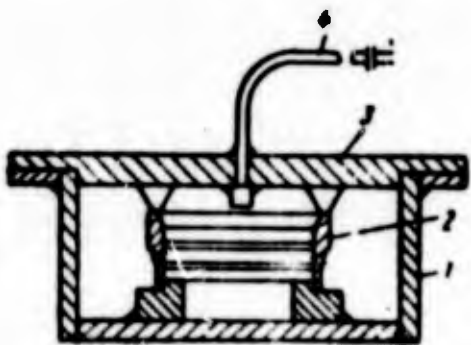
Container for soldering of head in a vacuum. 1) container; 2) block of injectors (casing, dome, injectors); 3) cover of container; 4) tube for connection to vacuum-pump.
